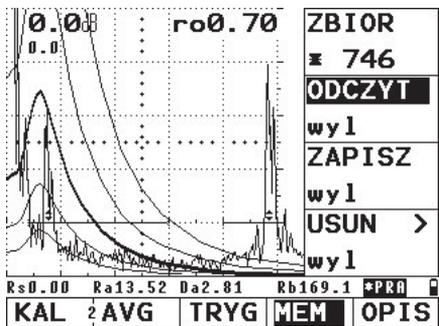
Ultrasonic tests result – detection of gas pore inside weld
